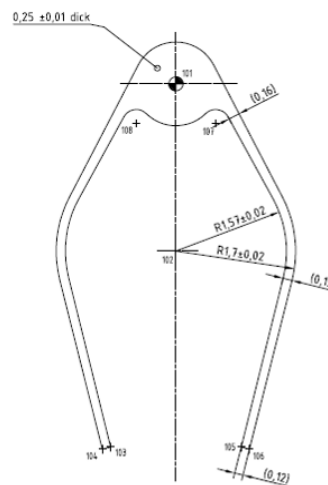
Drawing showing the cutting pattern concerning the spring.
